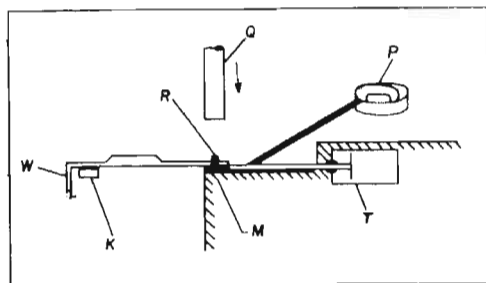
Mating of spring *W* with hole finding the rivet *R* on anvil *M*. Air cylinder *T* delivers rivet *R* from track of vibratory hopper *P*. Hammer *Q* upsets rivet shank.
